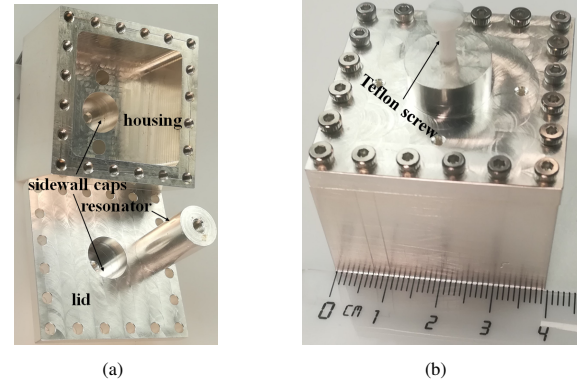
The fabricated tunable inset resonator prototype. (a) Disassembled and (b) assembled.
